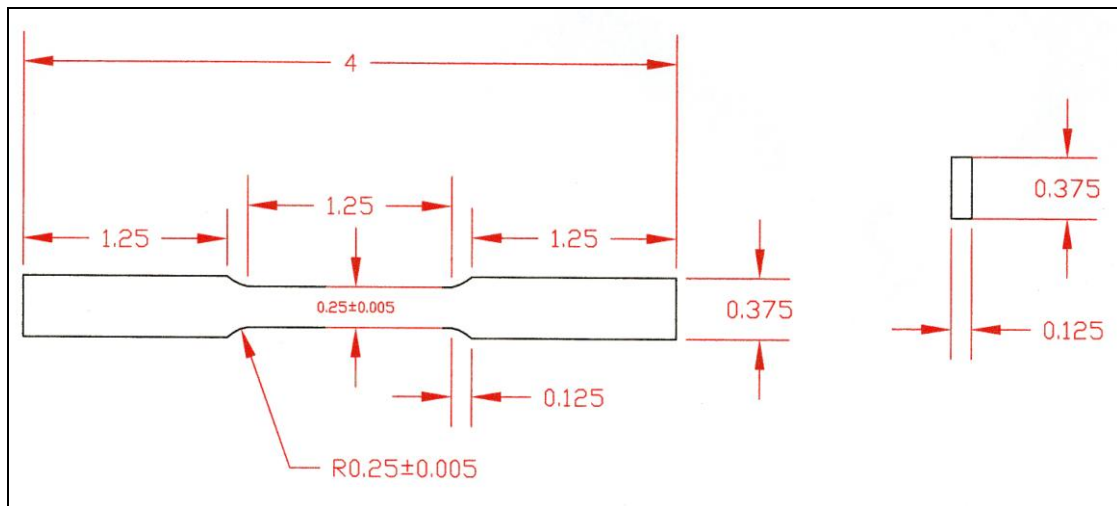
Small Dogbone Tensile Bar Used for Tensile Testing. Dimensions are in Inches.
